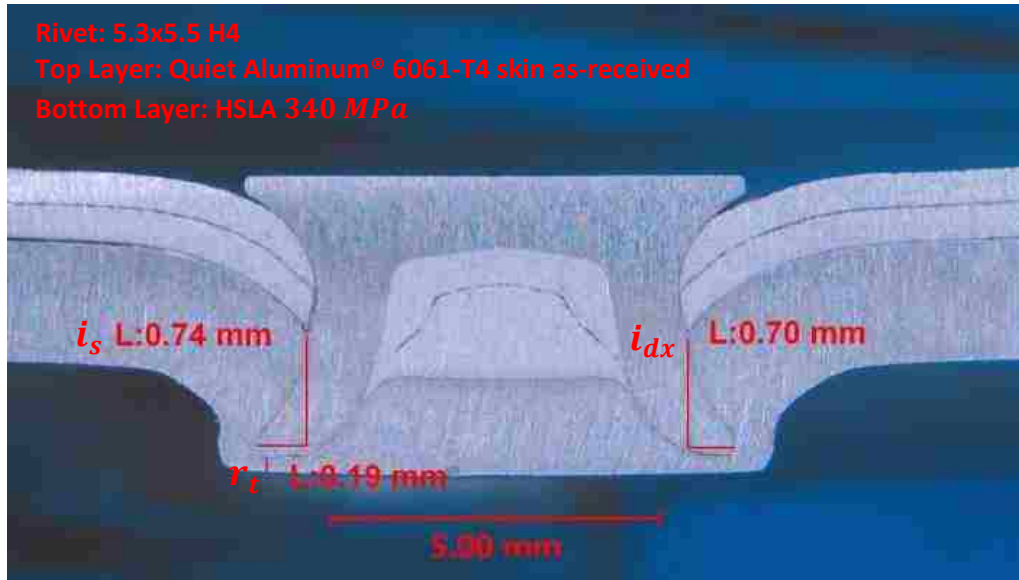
Microscope image on the cross section of the SPR joint with Quiet Aluminum® (6061-T4 skin as-received) and HSLA steel 340 MPa using flat die and 5.3x5.5 H4 rivet. The measurements in red indicate the inspected parameters of the joint. Low residual thickness was detected ($r_t = 0.19$ mm).
